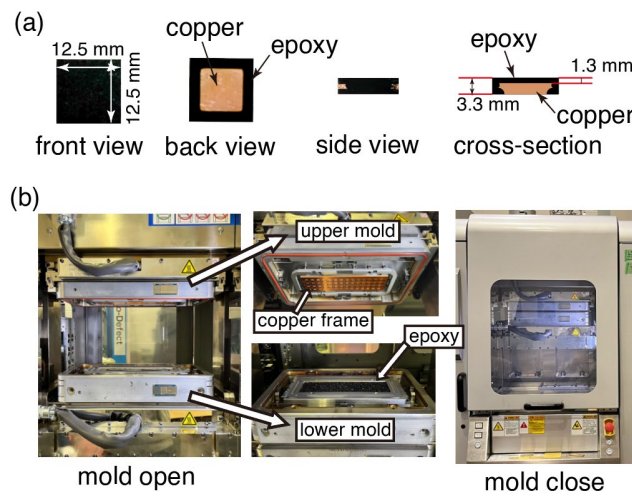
(a) Images of a package; (b) Images of the upper mold and lower mold.
